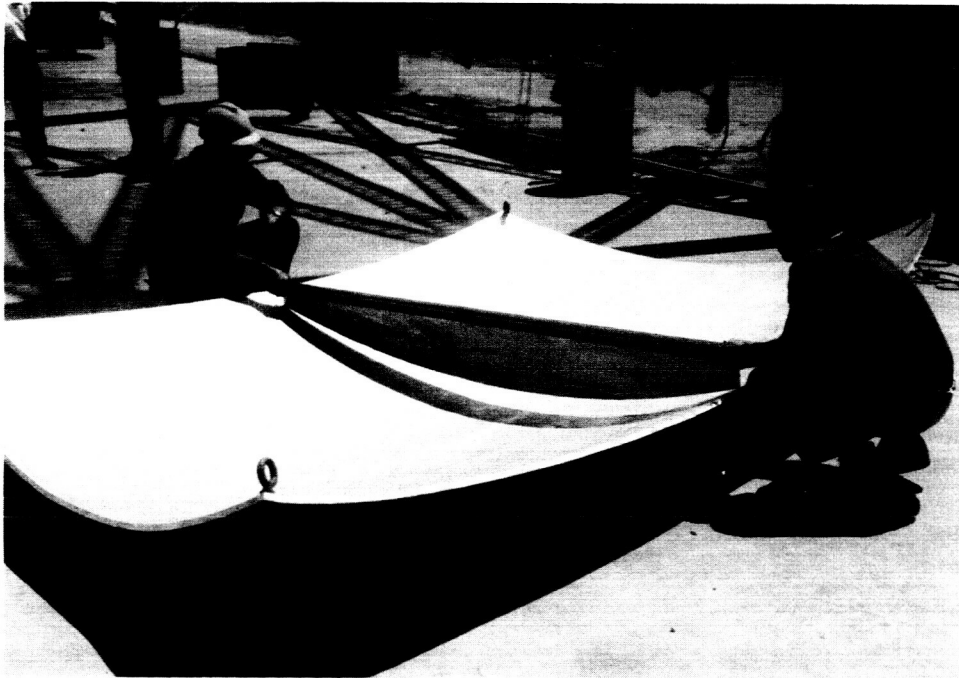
Test No. 7 Base Blank No. 3 Trimmed
